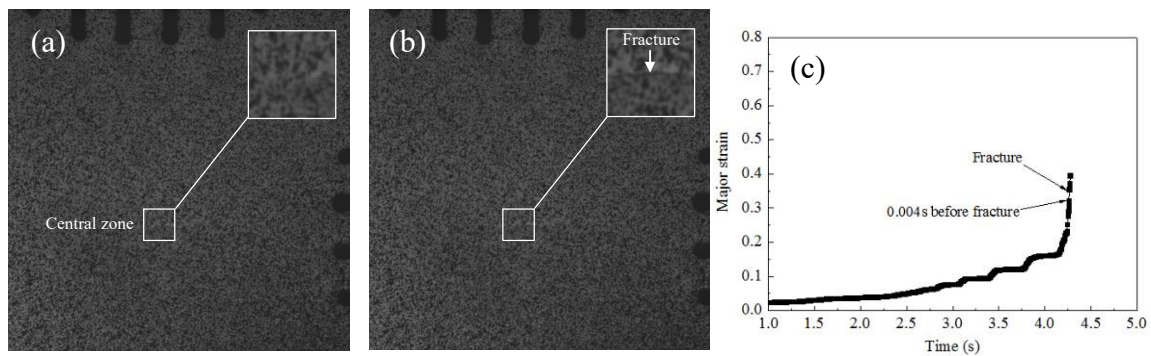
Identification of fracture for AA5086 specimen (non-reduced side) under biaxial tension: (a) 0.004s before fracture, (b) fracture, (c) Evolution of strain.
